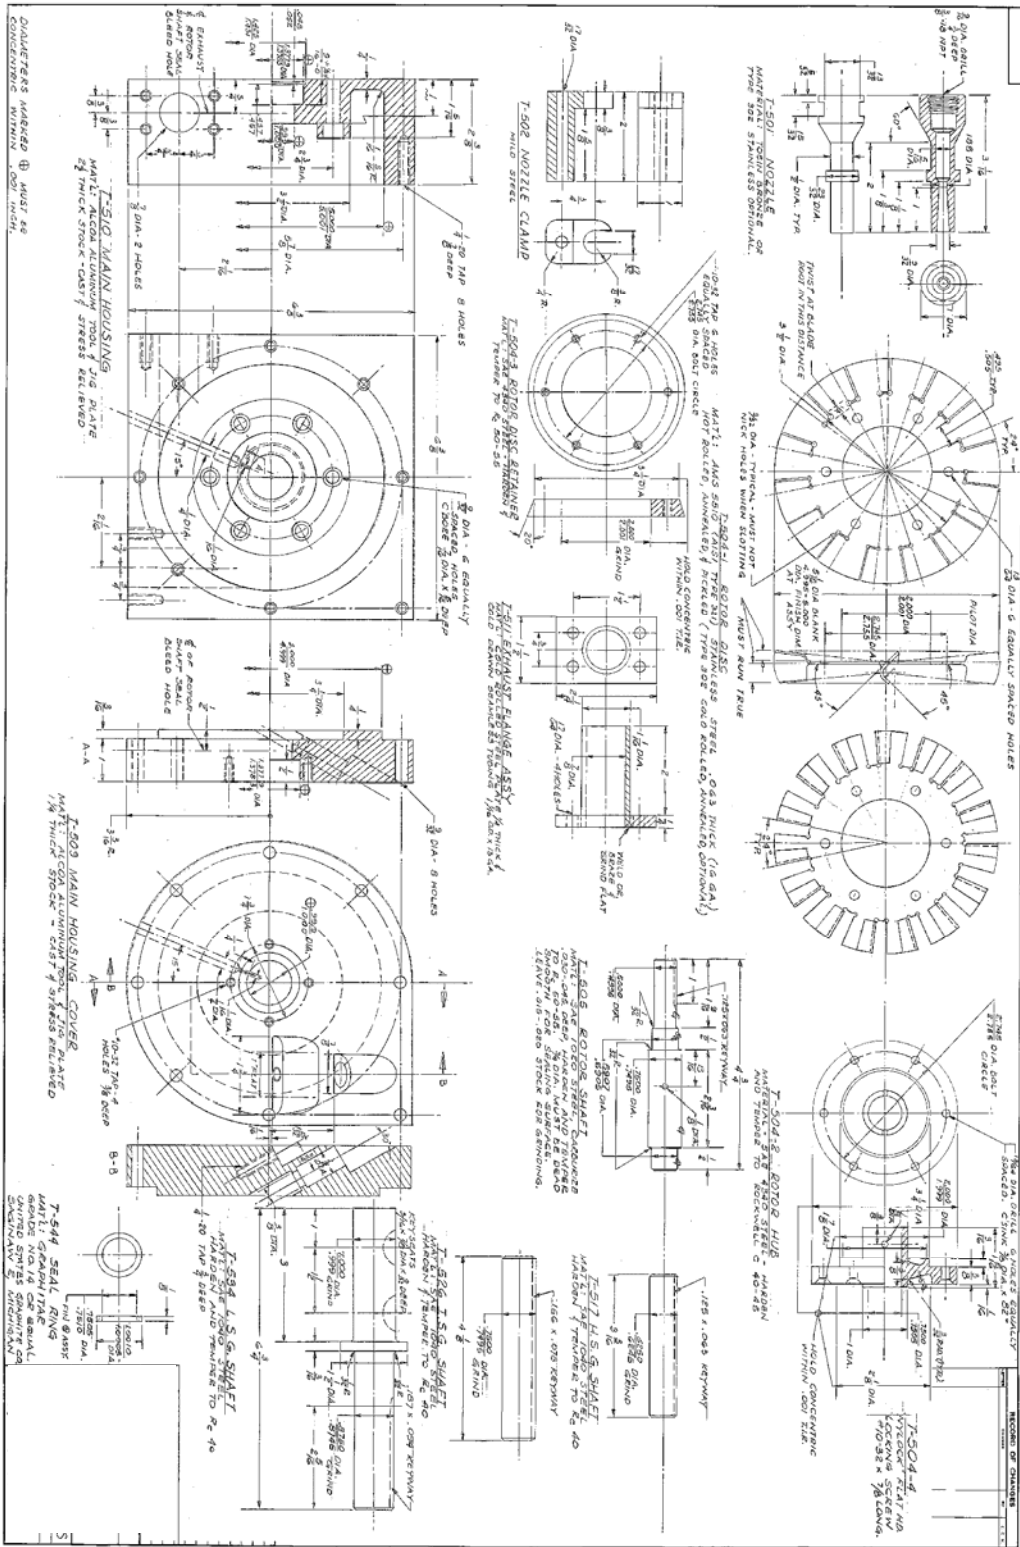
Detailed drawing of T-500 impulse steam turbine rotor (blades), housing, and nozzle design.
